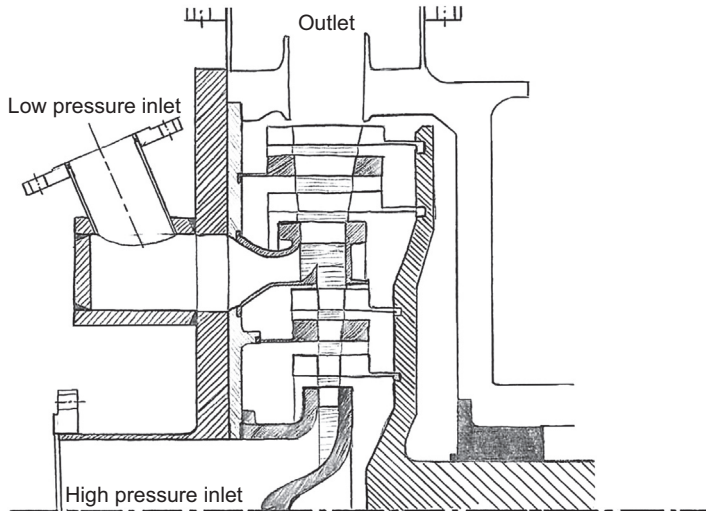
Schematic drawing of the multipressure radial outflow turbine.
